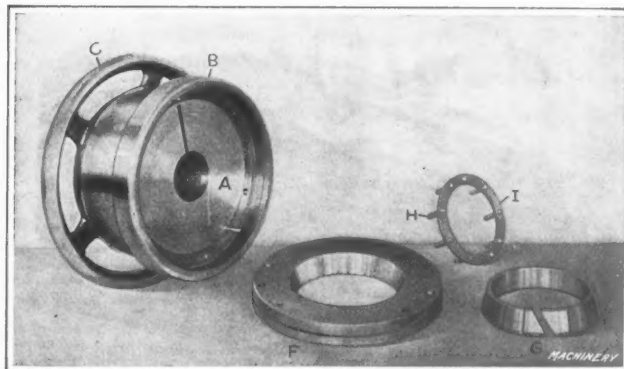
"Pitch Line Control" Type of Chuck for holding Spur Gears
